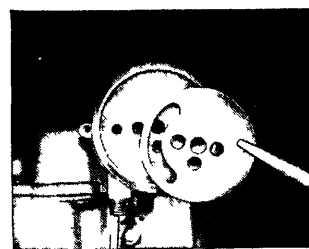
Install piston plate housing and new cork insulator. Be sure white paper air horn gasket is installed between air horn and piston plate housing using
